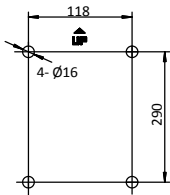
Mounting Base Dimension of the Bracket Type I (mm)
